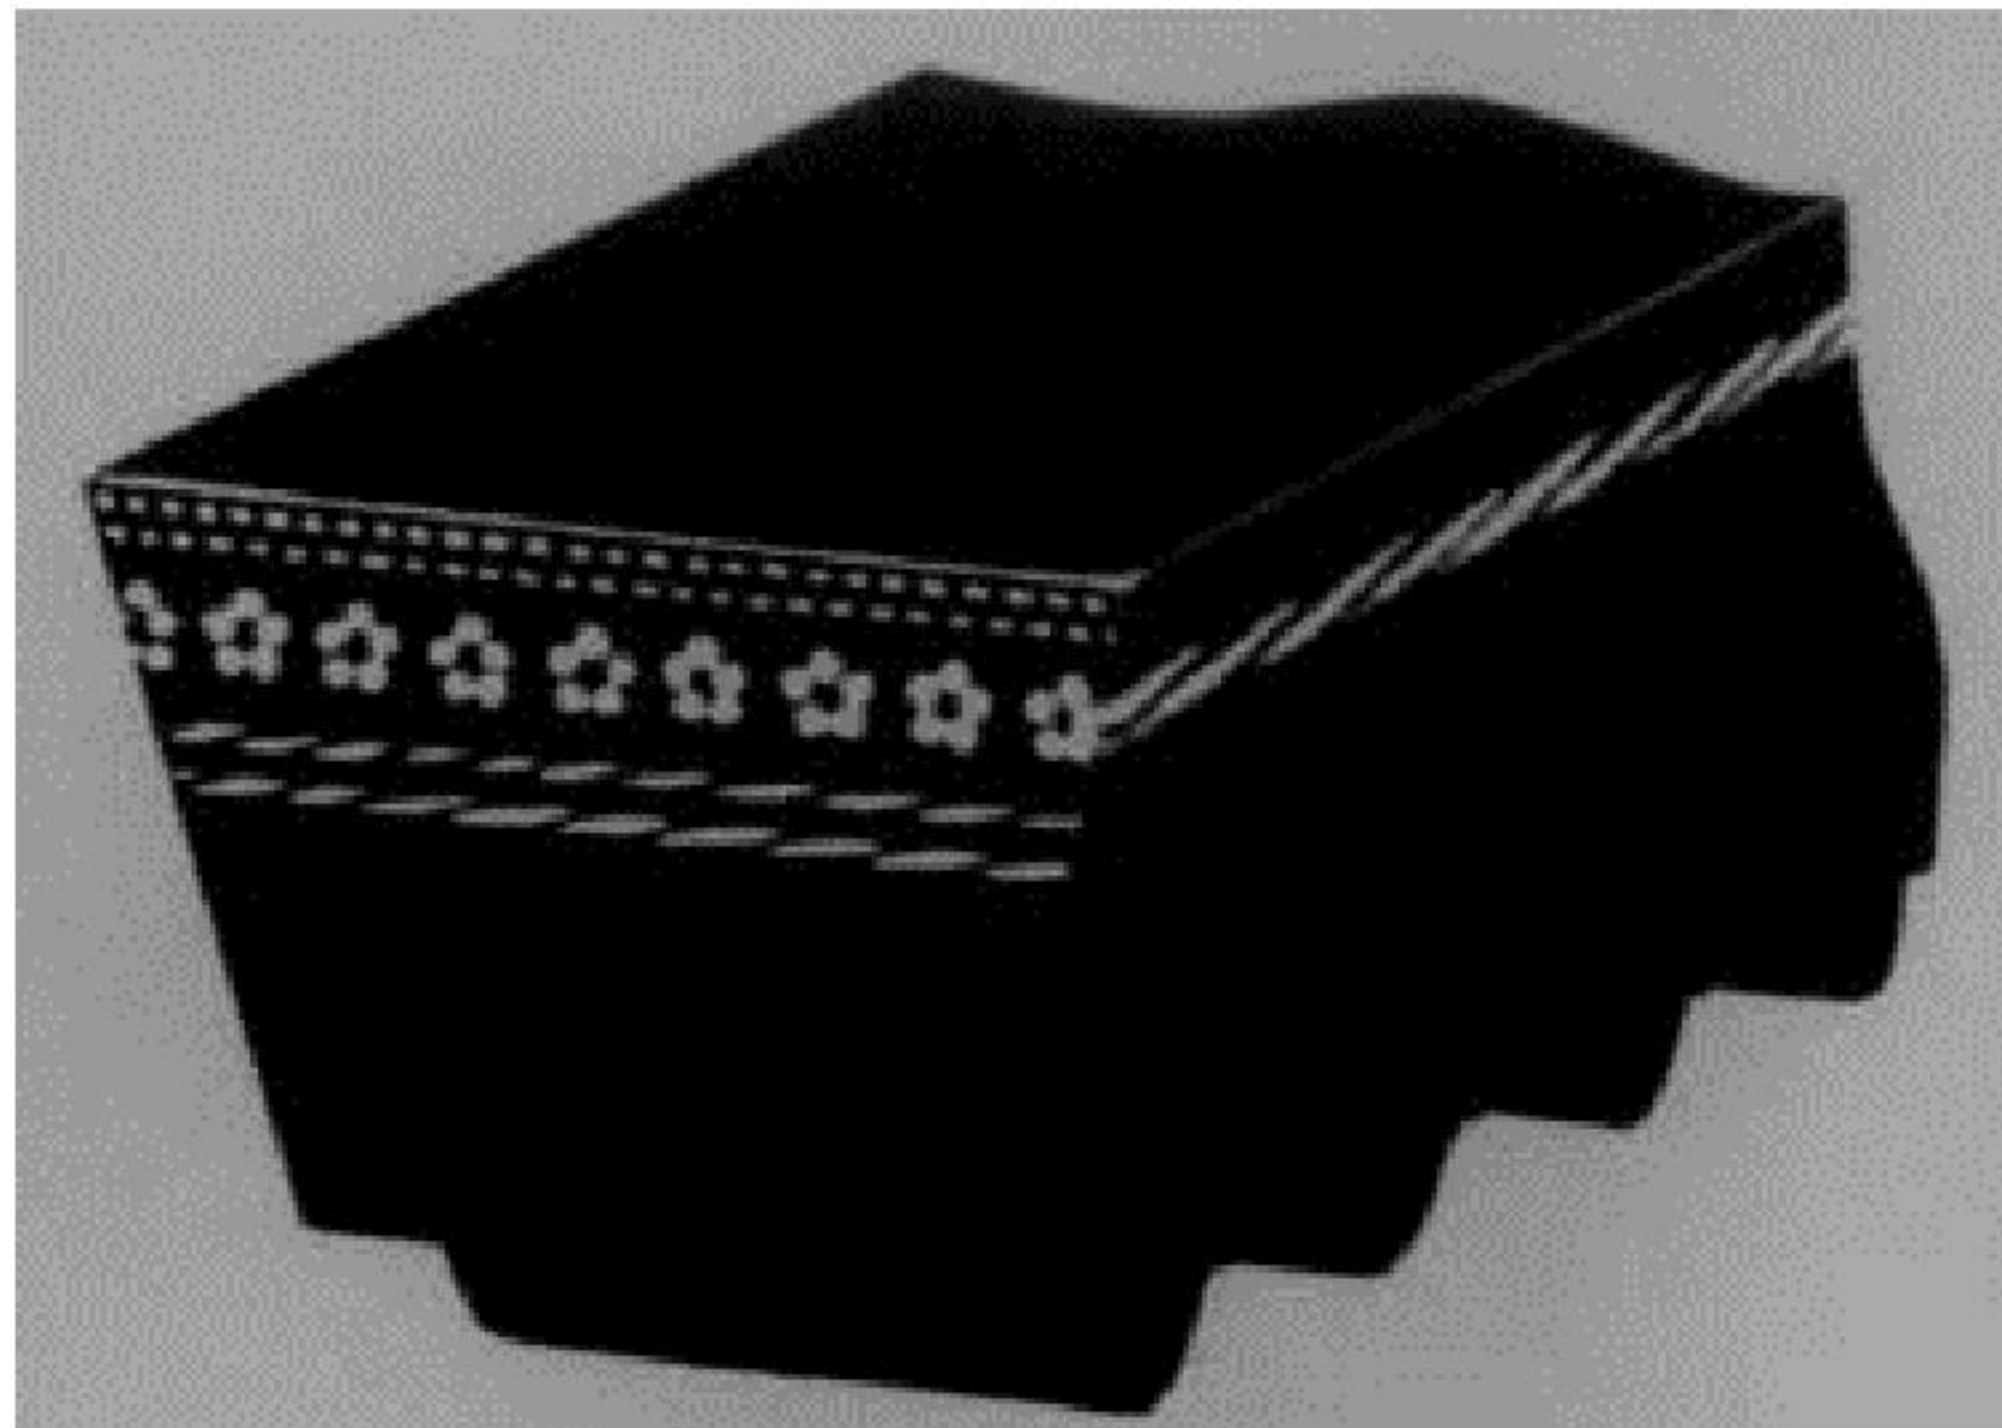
Typical classic cross-sectional V-belt molded notch construction.
